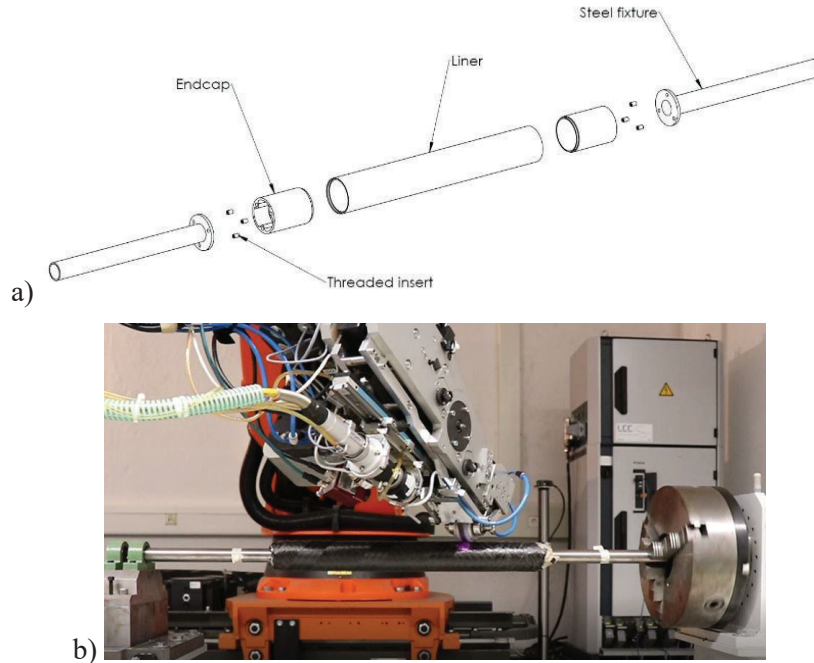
Filament winding process for the composite pressure vessels, showing a) a schematic of the spindle-mandrel assembly and b) pressure vessel fabrication on a filament winding machine.
